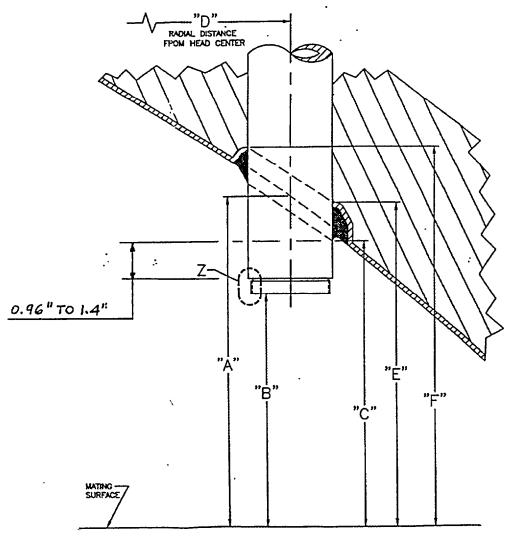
, IP3 Penetration Nozzles - Head Nozzle Weld Area
